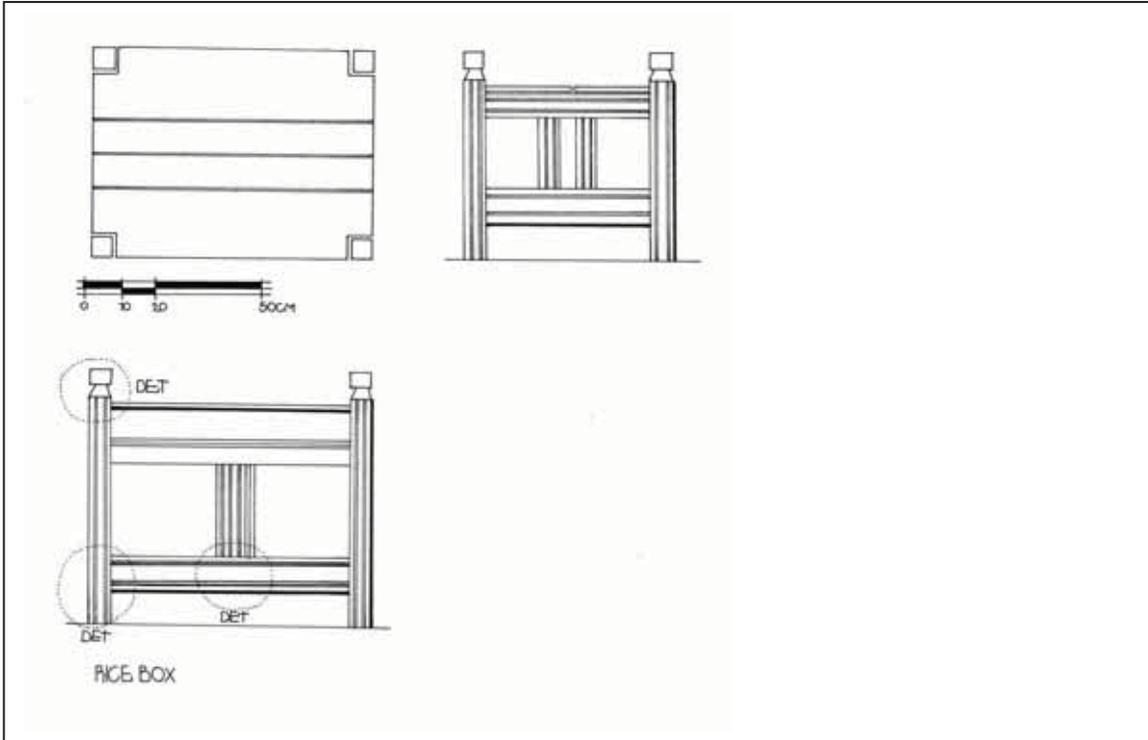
Plan and elevations of a rice box. Drawing by author, 2012.
